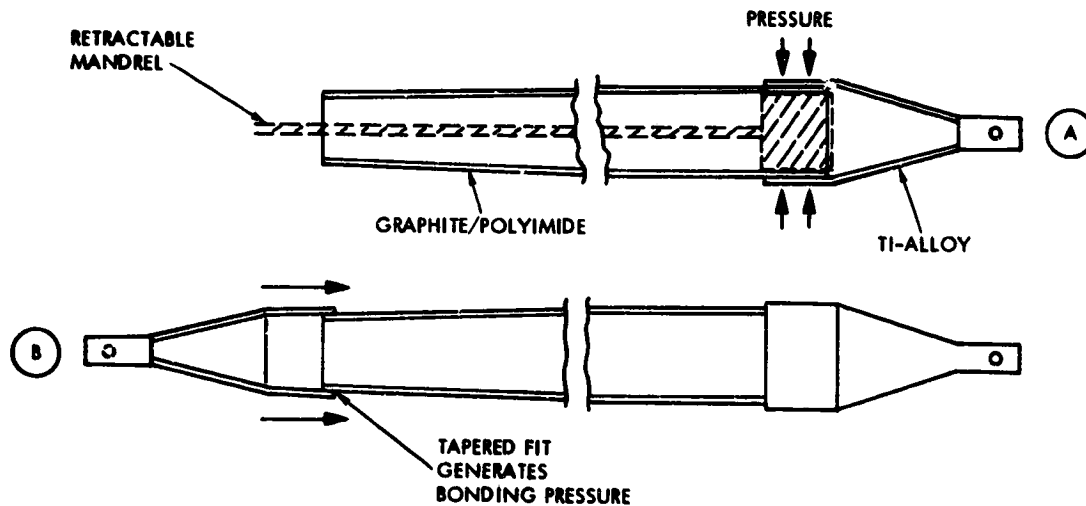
Assembly of Truss Members (Adhesive Bonding of Tubings to Brackets)
